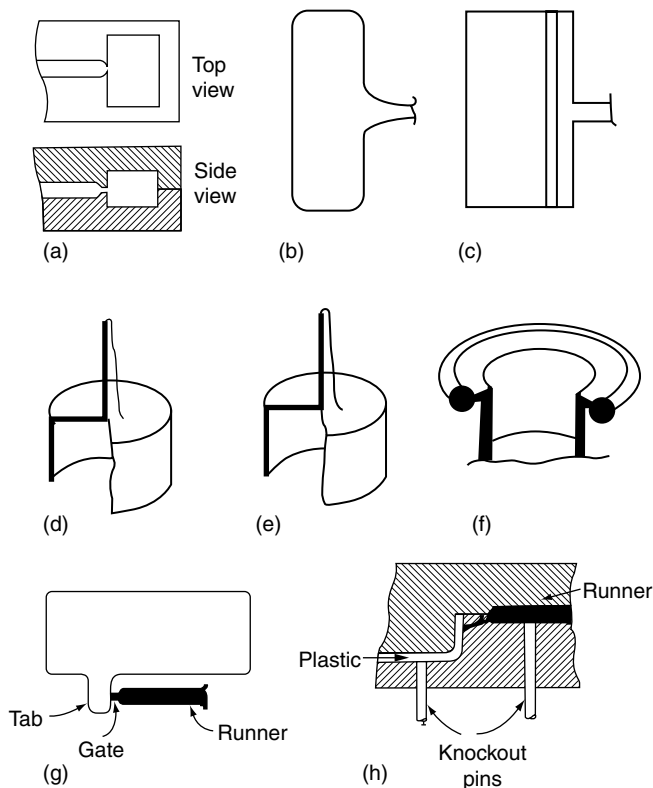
Gating design: (a) edge; (b) fan; (c) flash; (d) sprue; (e) diaphragm; (f) ring; (g) tab; (h) submarine.
